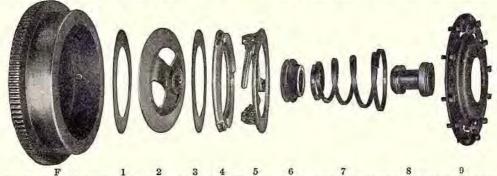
Parts of the Borg & Beck dry-plate clutch. (F) represents the flywheel ready for the clutch parts, which are shown disassembled in the order in which they are to be assembled. Note that inside of the flywheel the dowel pins that carry the thrust ring (4) are shown projecting (see also (P) Fig. 26.) The Borg & Beck Co., Chicago, are the manufacturers.
